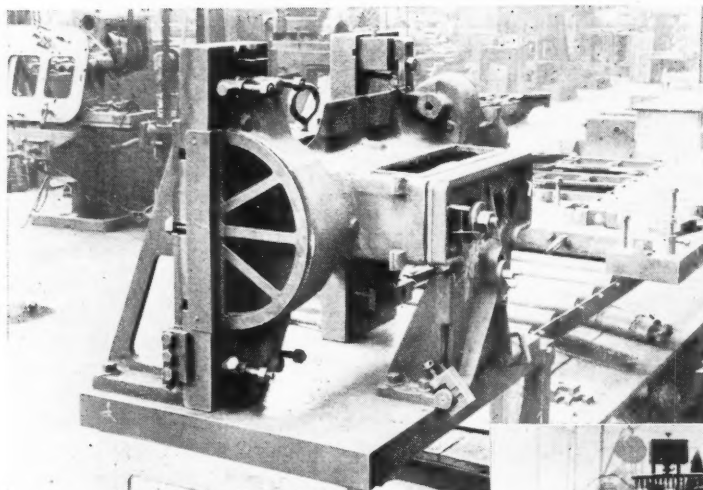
(left)—Cylinder block fixture used in the Hotchkiss plant for first milling and drilling operations as well as for checking machining allowances on casting
